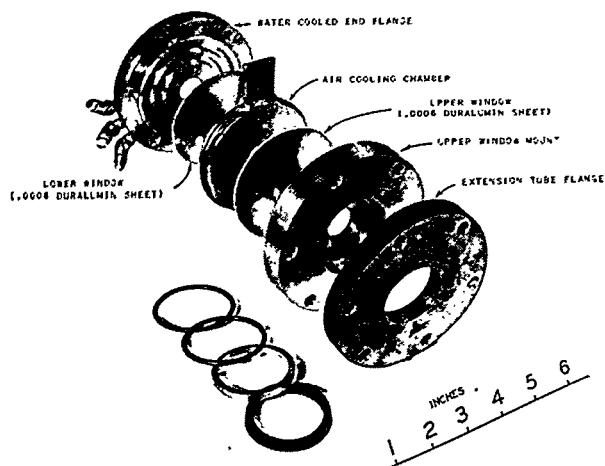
TARGET CHAMBER WINDOW ASSEMBLY
